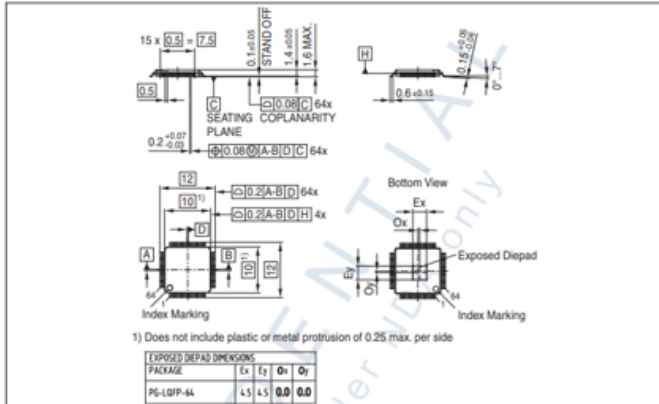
PG-LQFP-64-27 (package without u-groove will replace PG-LQFP-64-18)
